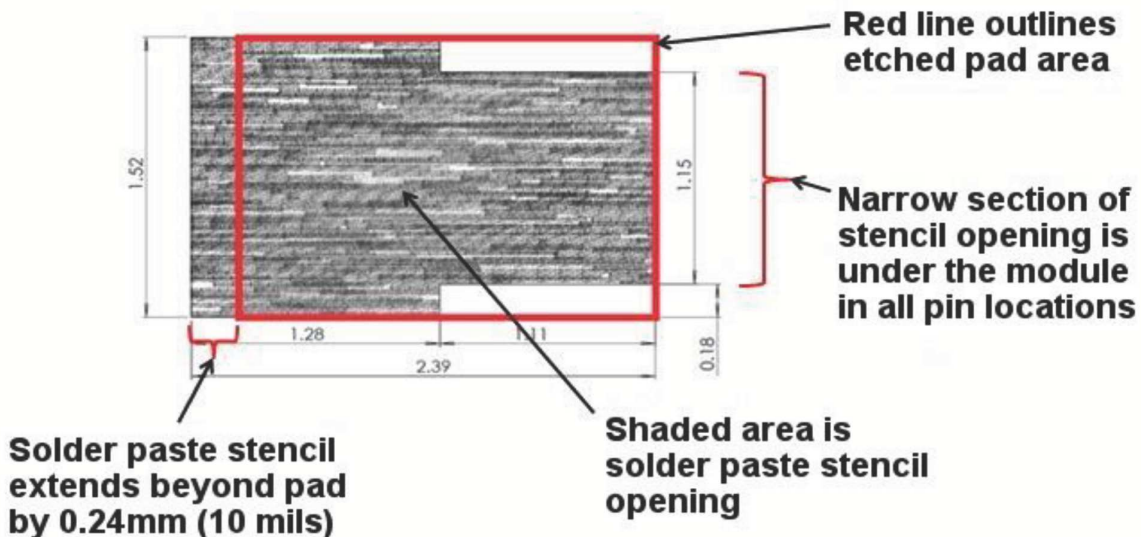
RS1000 Recommended Pastemask Footprint – Single Pad
